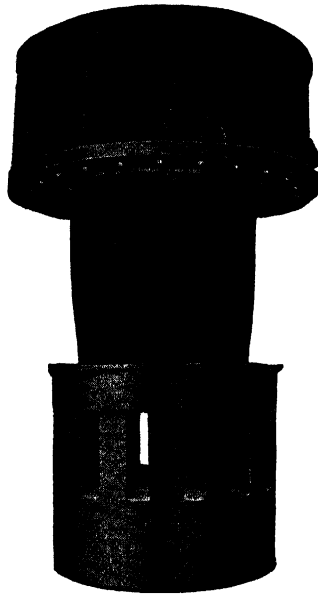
Power Cylinder Showing Exhaust Ports Cast Integral with the Cylinder Barrel. The Large Area for Water Jacket and the Mounting Flange, Bethlehem Engine
